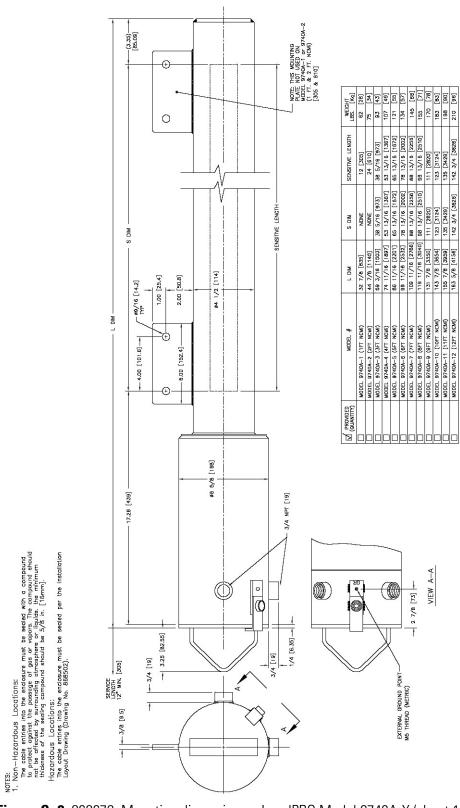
868672: Mounting dimensions – LevelPRO Model 9740A-X (sheet 1 of 1)
